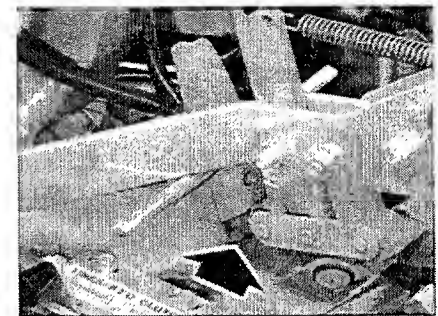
With Drive Lever in FORWARD position, clutch roller should be engaged slightly beneath the adjustment block.
